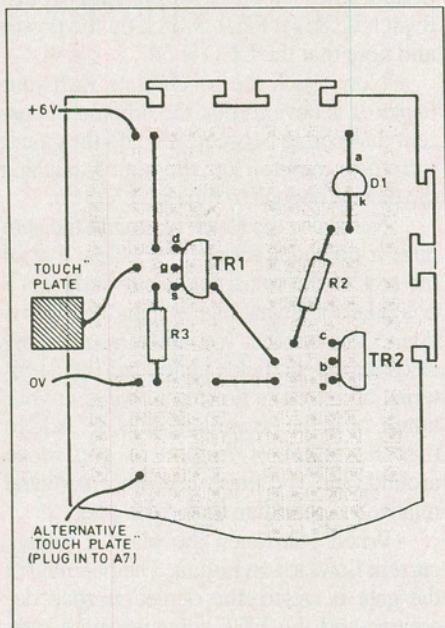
Demonstration breadboard component layout for the FET Touch Switch.
